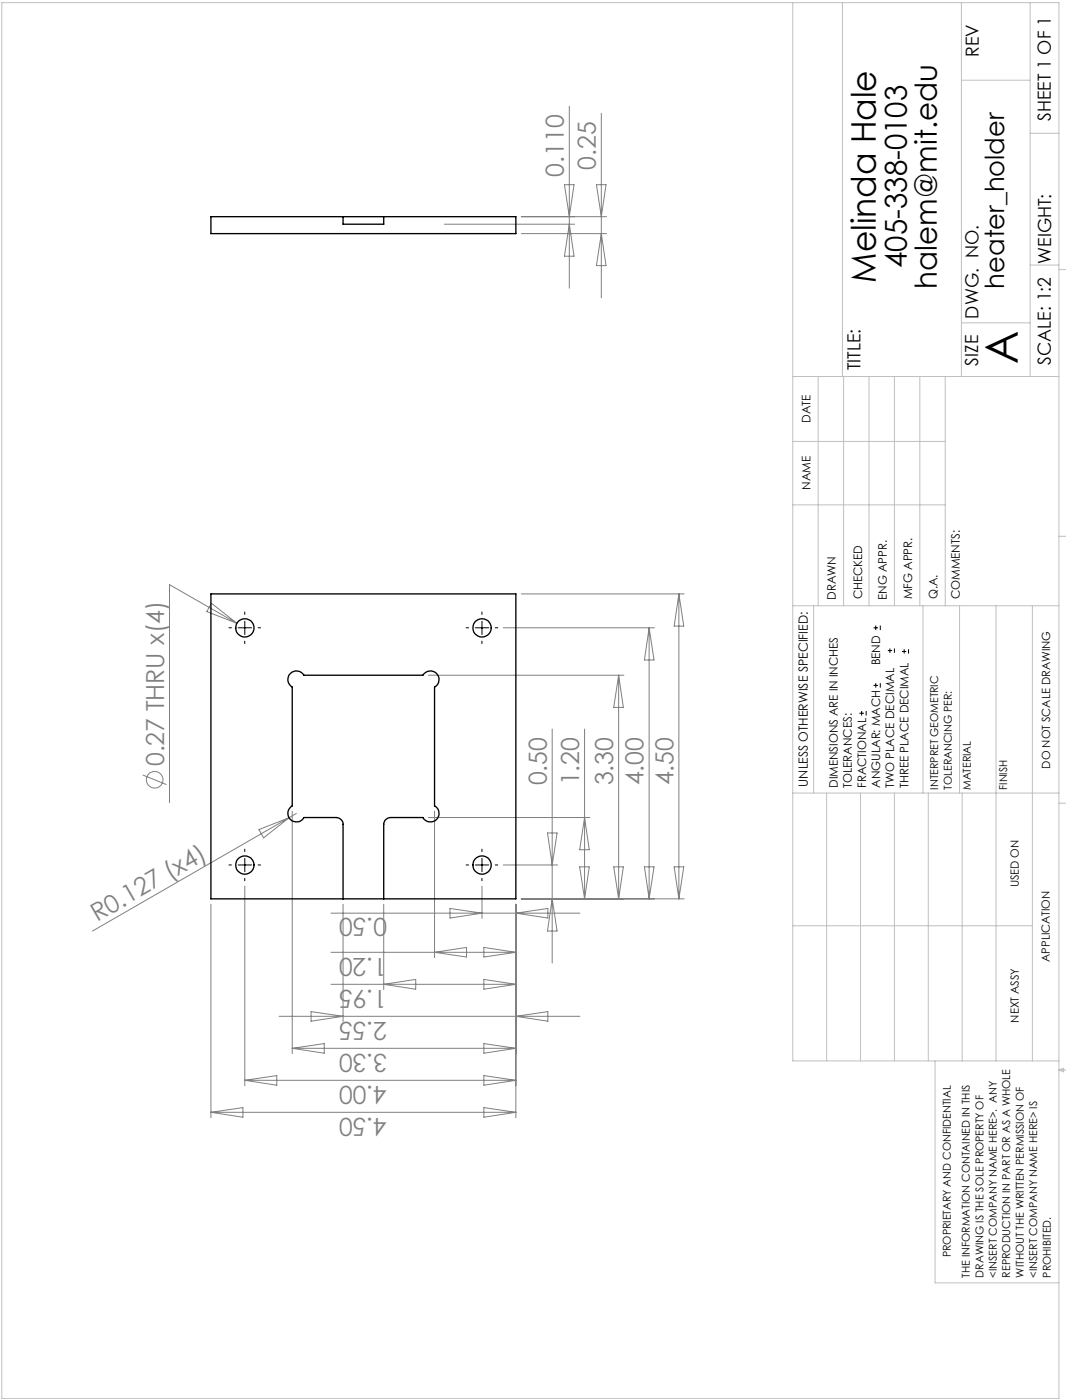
Detailed drawing of heater holder, part of substrate chuck assembly
